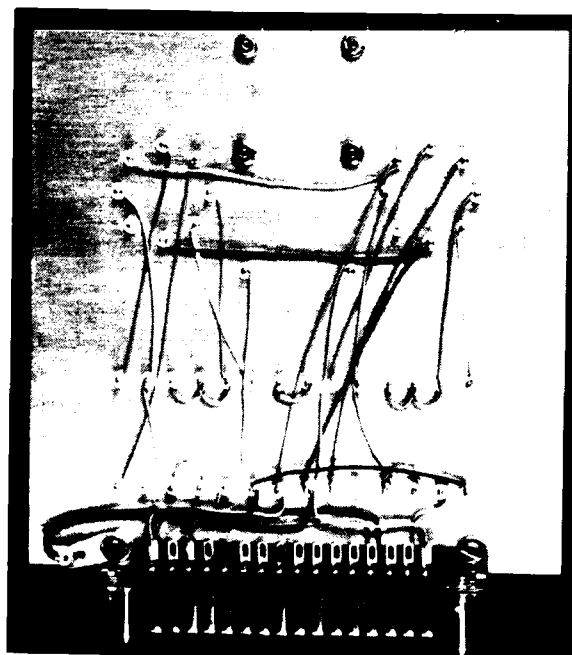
Component layout, Card No. 11, MCU ship's angular motion meter drive.
